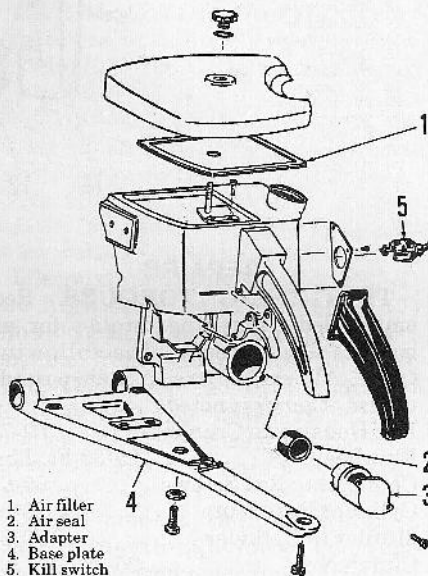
Exploded view of fuel tank, air box and rear handle typical of later models.
